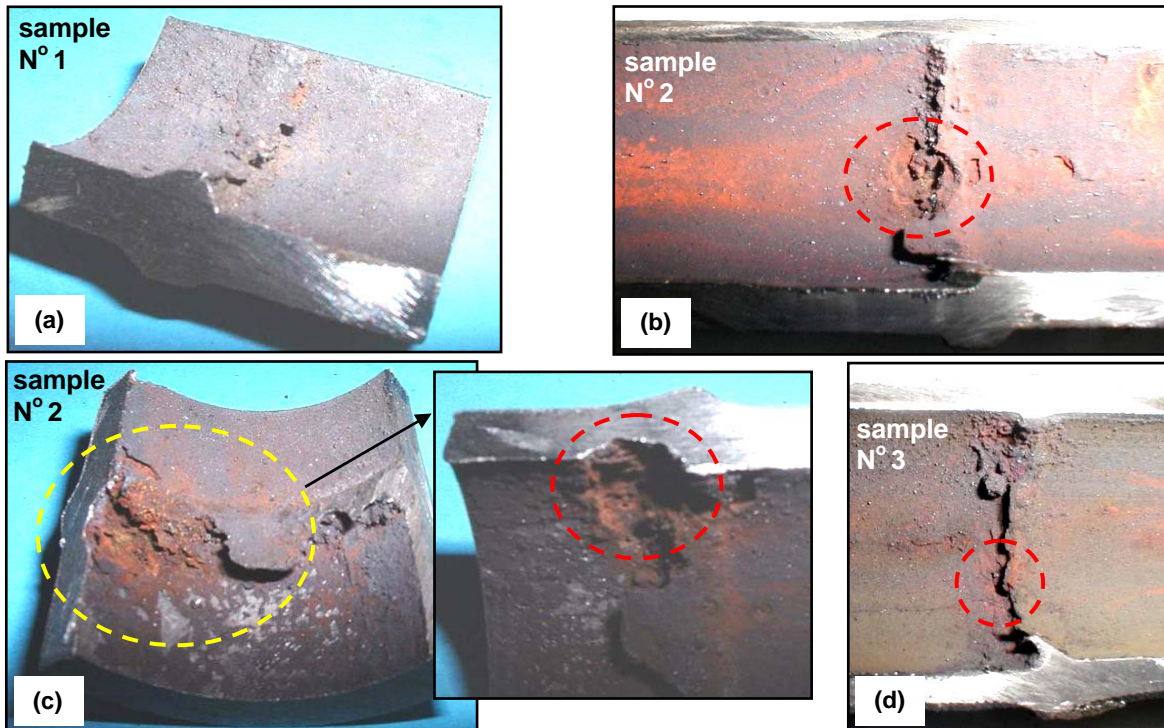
(a)-(c) – Macro photo of tube weld defects, "direct" and "indirect" damages
